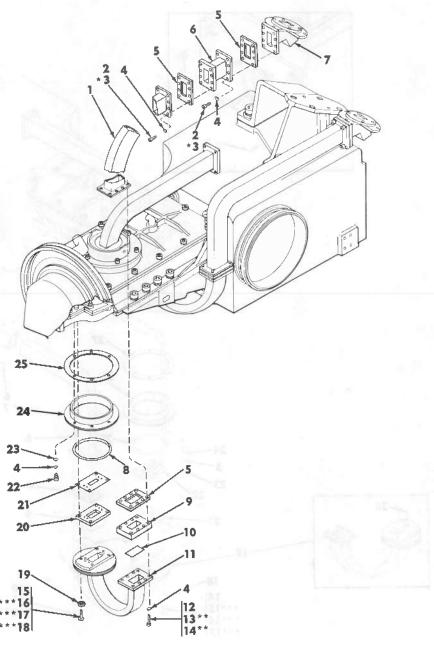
DUPLEXER /9159973/-PARTIAL EXPLODED VIEW /SEE FIGURE 119 FOR NEXT HIGHER ASSEMBLY/
